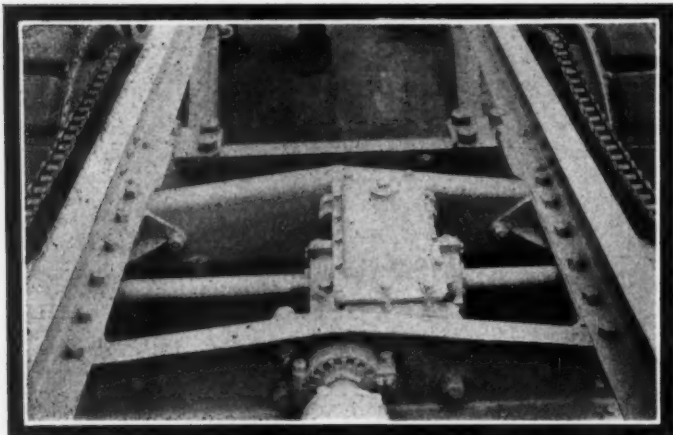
Rear end of Hewitt chassis, showing suspension of jackshaft, side chains, substantial chassis construction, and considerable overhang
